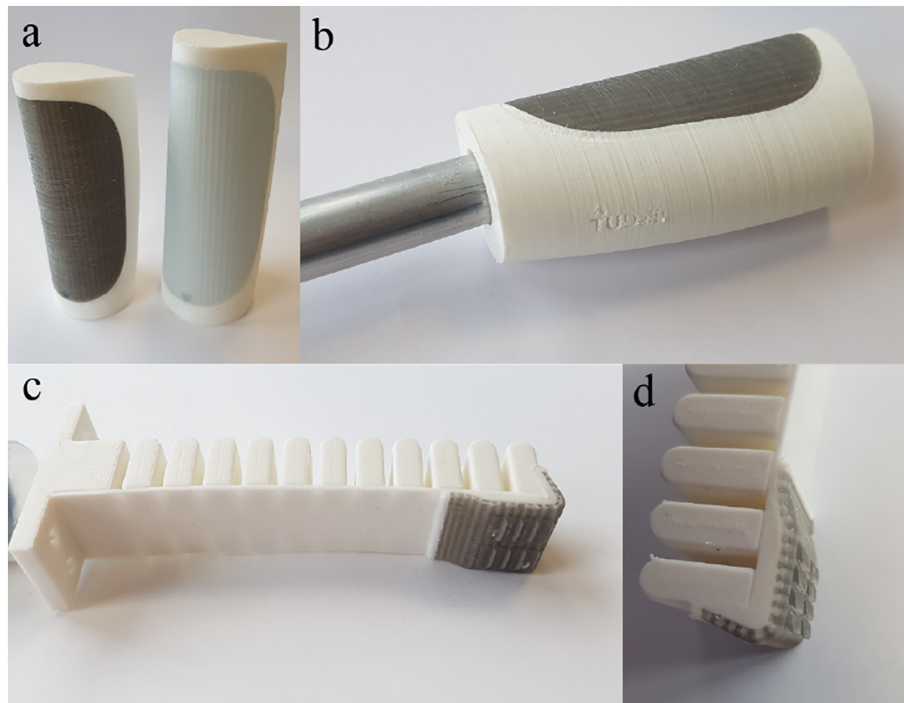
Examples of over molded parts fabricated using the presented method. (a) Custom handles. (b) Handle in context. (c) Soft robotic finger with over molded silicone finger tip. (d) Close-up of silicone gripping element.
